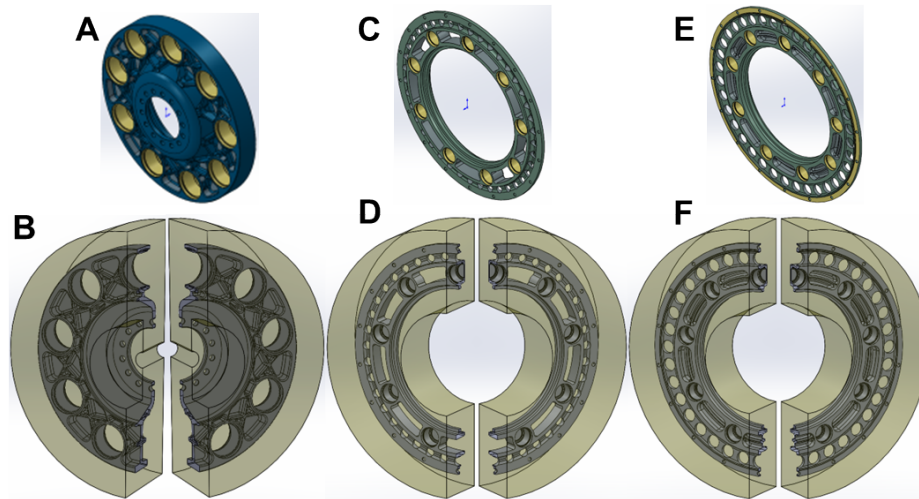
A) Input flange for the 100kW magnetic gearbox and the B) topologically optimized sand printed mold for the flange. C) Input drive ring for the 100kW magnetic gearbox and the D) topologically optimized sand printed mold for the input drive ring. E) Input ring for the 100kW magnetic gearbox and the F) topologically optimized sand printed mold for the input ring.
